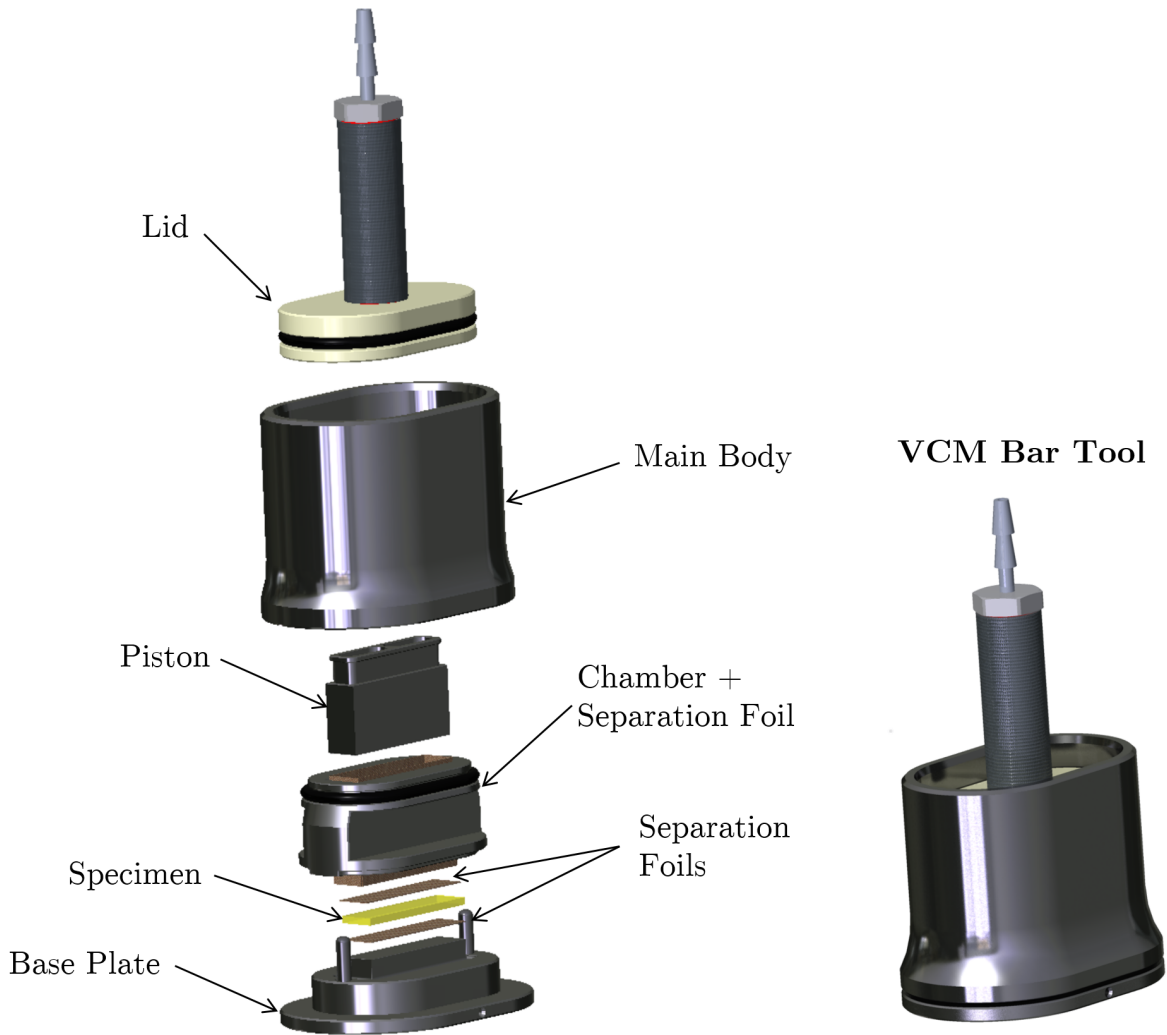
VCM Bar Tool explosion view (left) and assembled (right)
